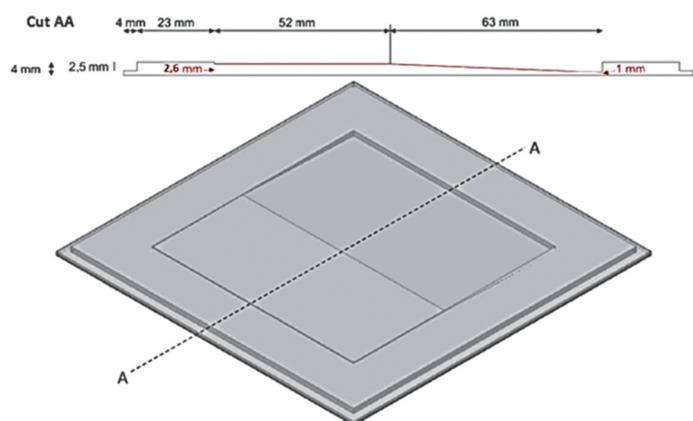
Technical drawing of the aluminium filter 2. Top image refers to the cross-sectional view of the piece represents three-dimensional in the image below
